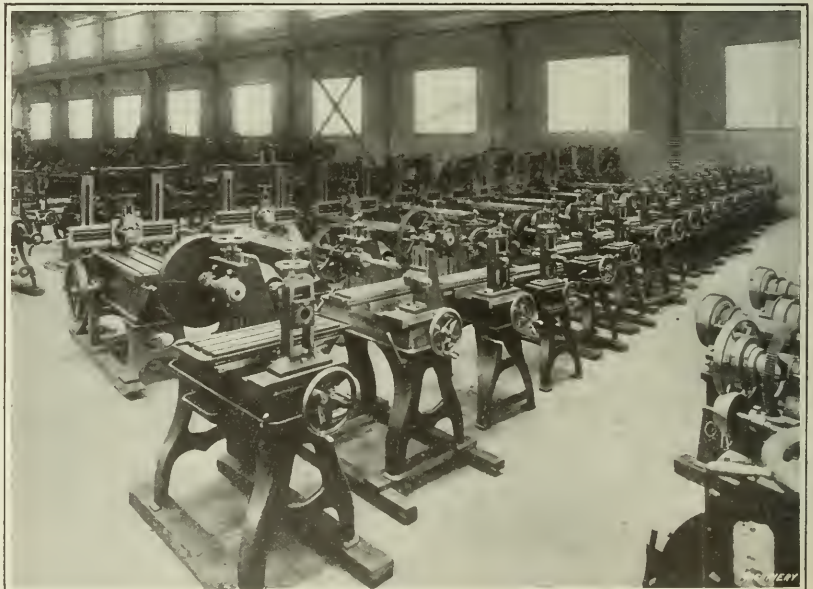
Re-manufactured Planers and Lincoln Milling Machines Complete and Ready for Sale
